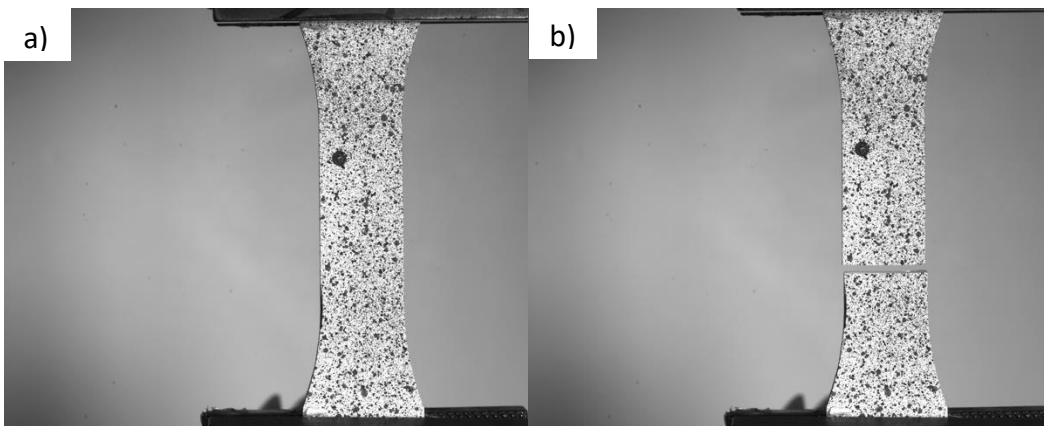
Specimen n.3 a) Before testing b) After fracture.
